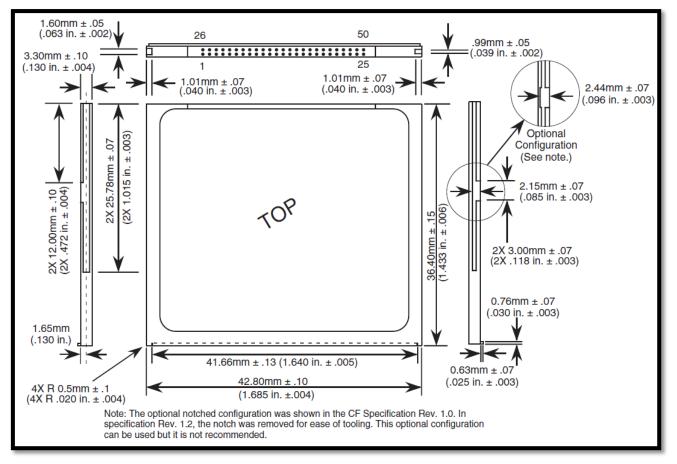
APRO SLC Industrial CompactFlash[®] Card Dimension
